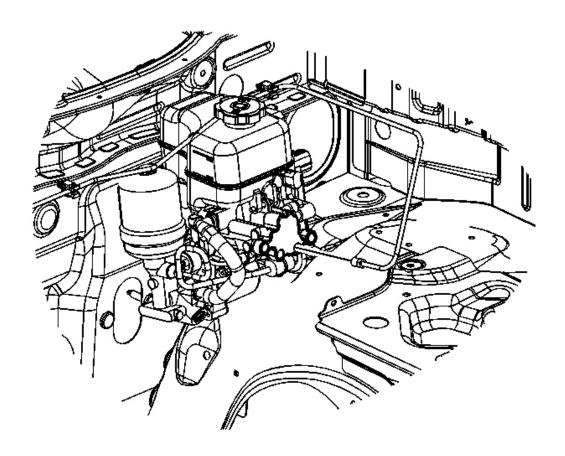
Identifying Right Front Brake Pipe At Brake Master Cylinder Courtesy of GENERAL MOTORS CORP.
